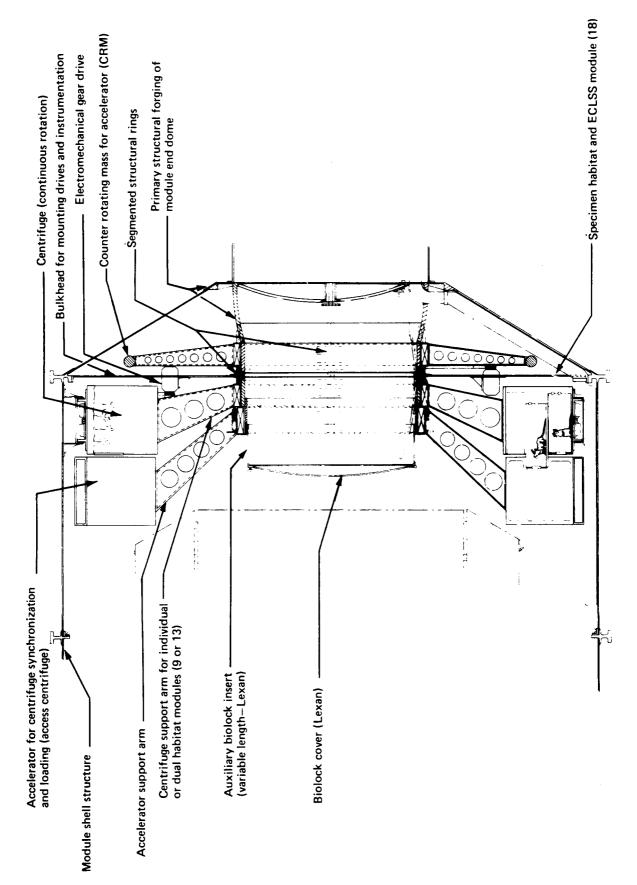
Details of 13 ft Centrifuge With Access Centifuge and Counterbalance
